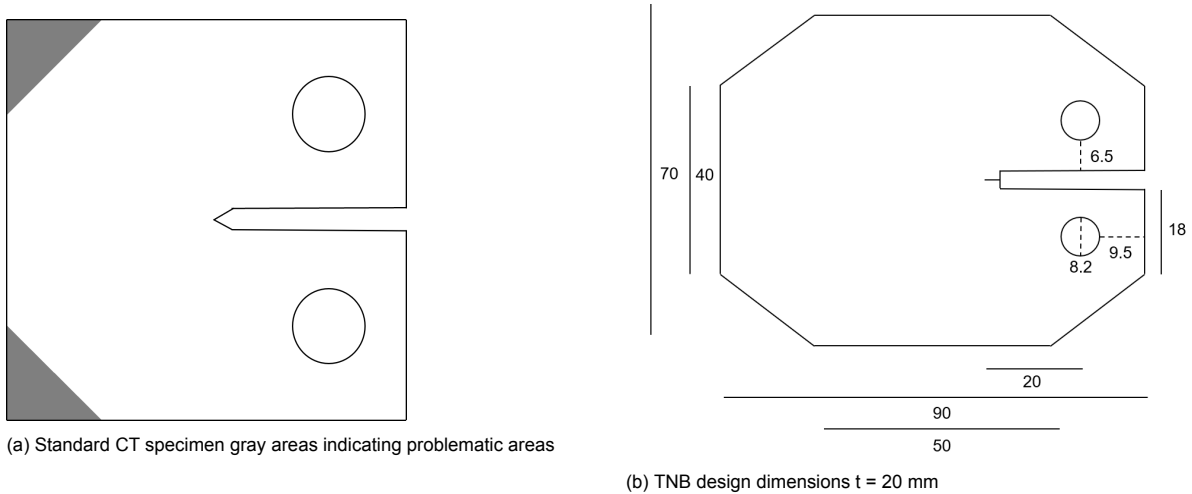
design dimensions 2TCT fatigue testing in mm
